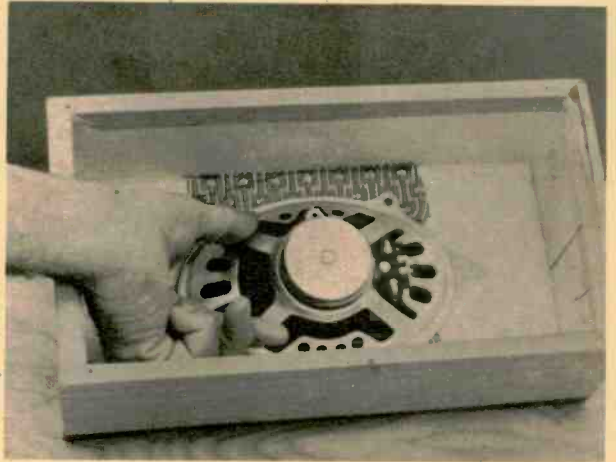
Mount 5 x 7-in. speaker in cabinet, using flathead machine screws installed before fiberglassing. Stuff the cabinet with fiberglass wool.
